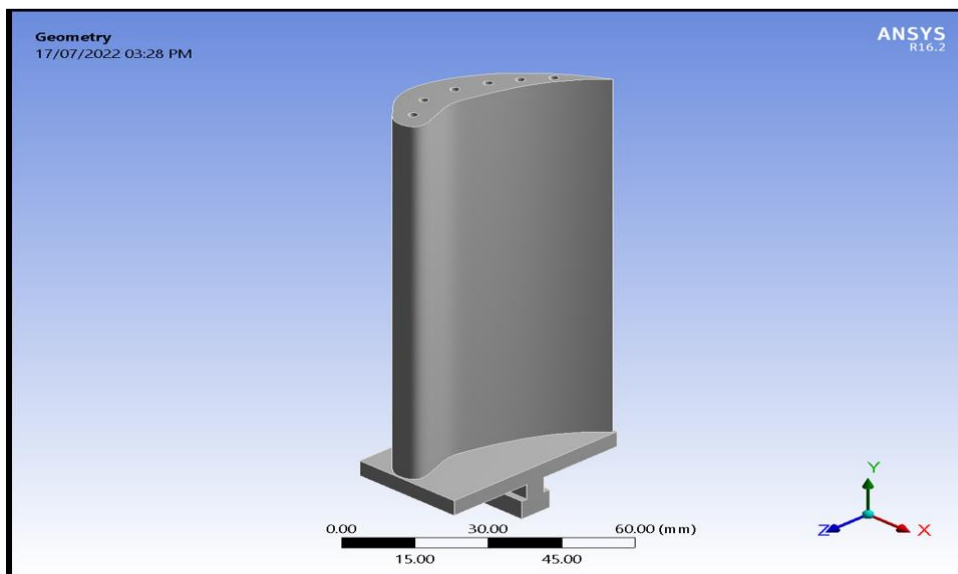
Geometry of a Gas Turbine blade model with 6 holes.
